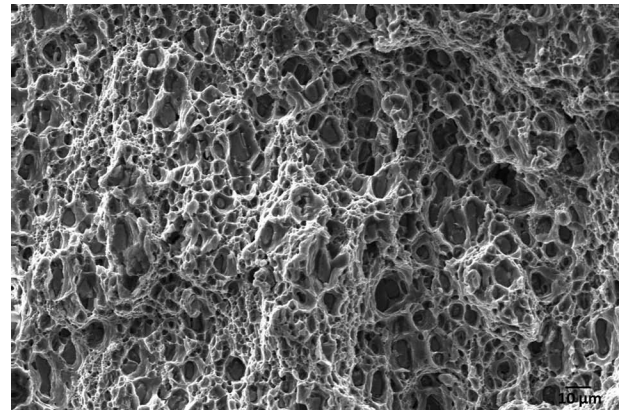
Higher magnified image of the fracture surface shown in Fig. 73. The fracture surface has fine near equiaxed dimples throughout
